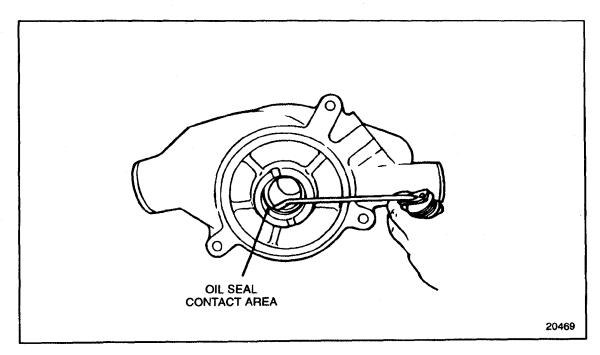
Oil Seal Contact Area Lubrication (GCM)
